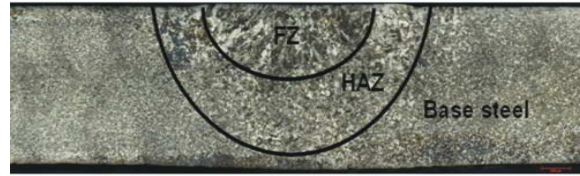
The macrostructure of steel weld with electrical current of 45 ampere current and 0.65 m min⁻¹ of welding speed
